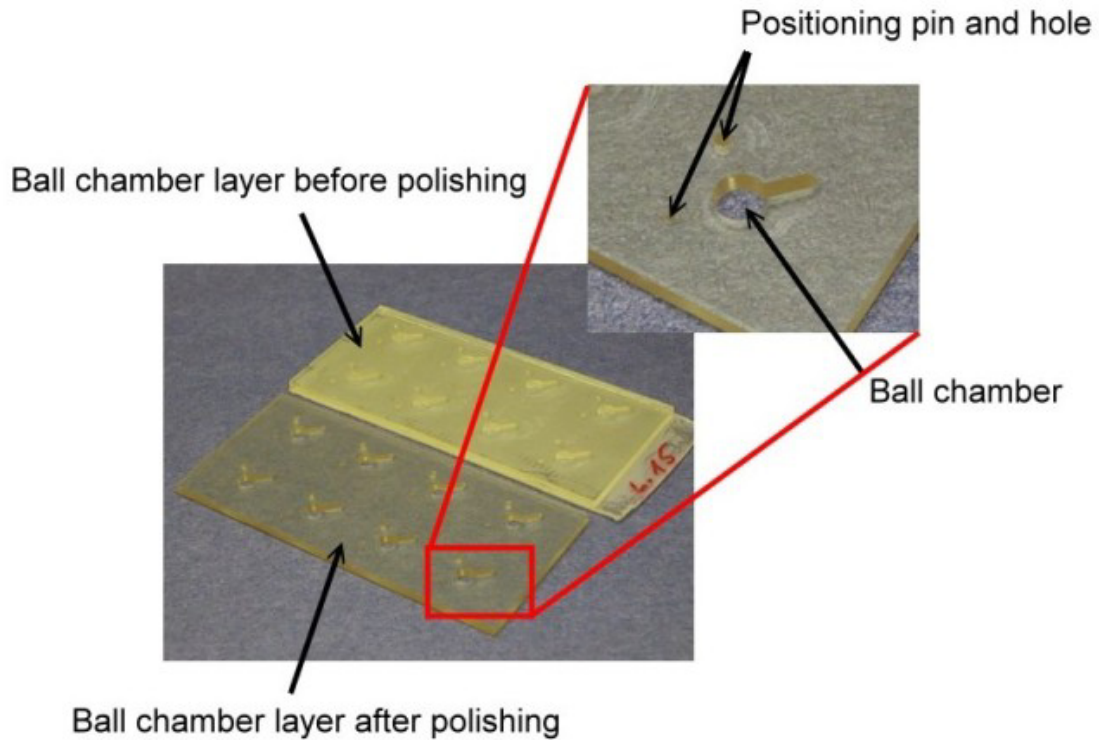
Molded PSU ball chamber layers with a thickness of 1.60 mm. The picture shows one before surface polishing and one after.
